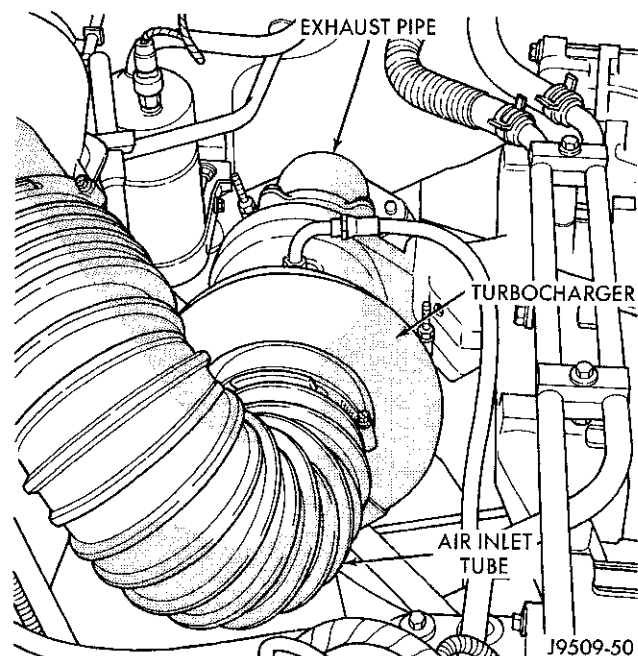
Air Intake Pipe, Exhaust Pipe and Turbocharger
